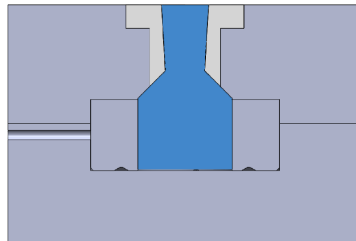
b: Cross-section view of the mould design, showing mould chamber injection volume highlighted in blue.
